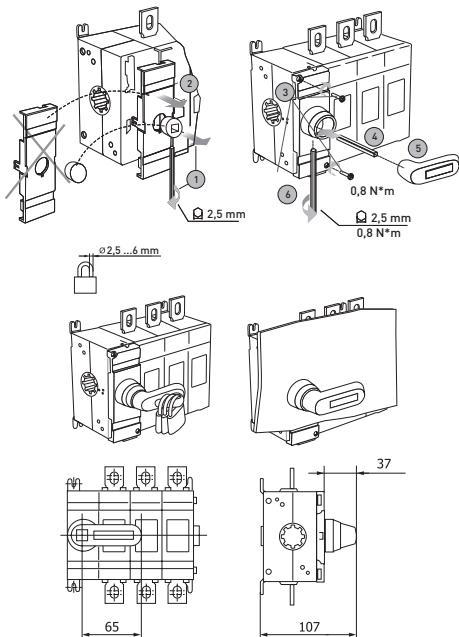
Installation of directly mounted rotary handle onto 160-250 A models
